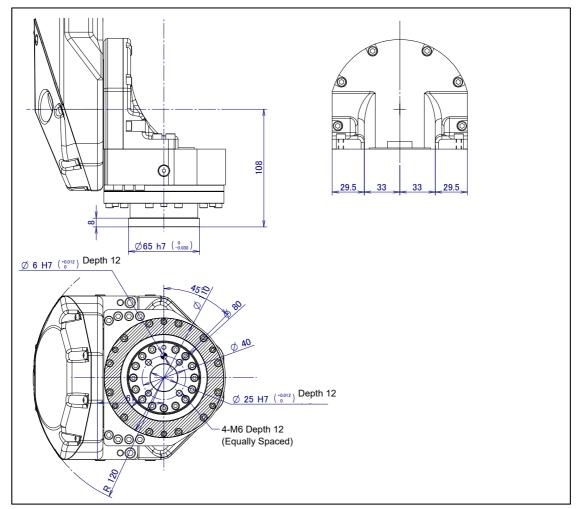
(c) End effector interface (When ISO flange adapter is installed) (ARC Mate 120iC, M-20iA)
